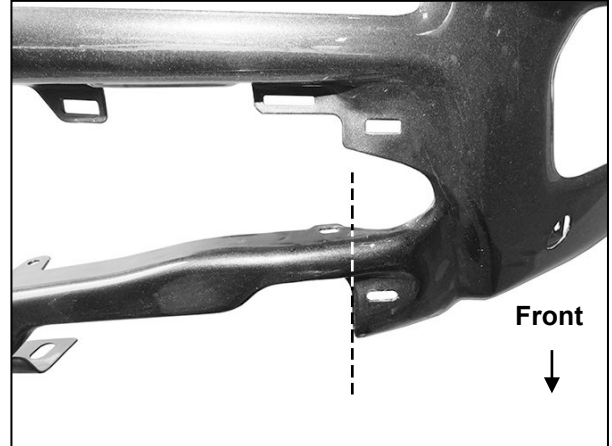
Remove bumper brackets from back of factory bumper (driver/left side pictured)
